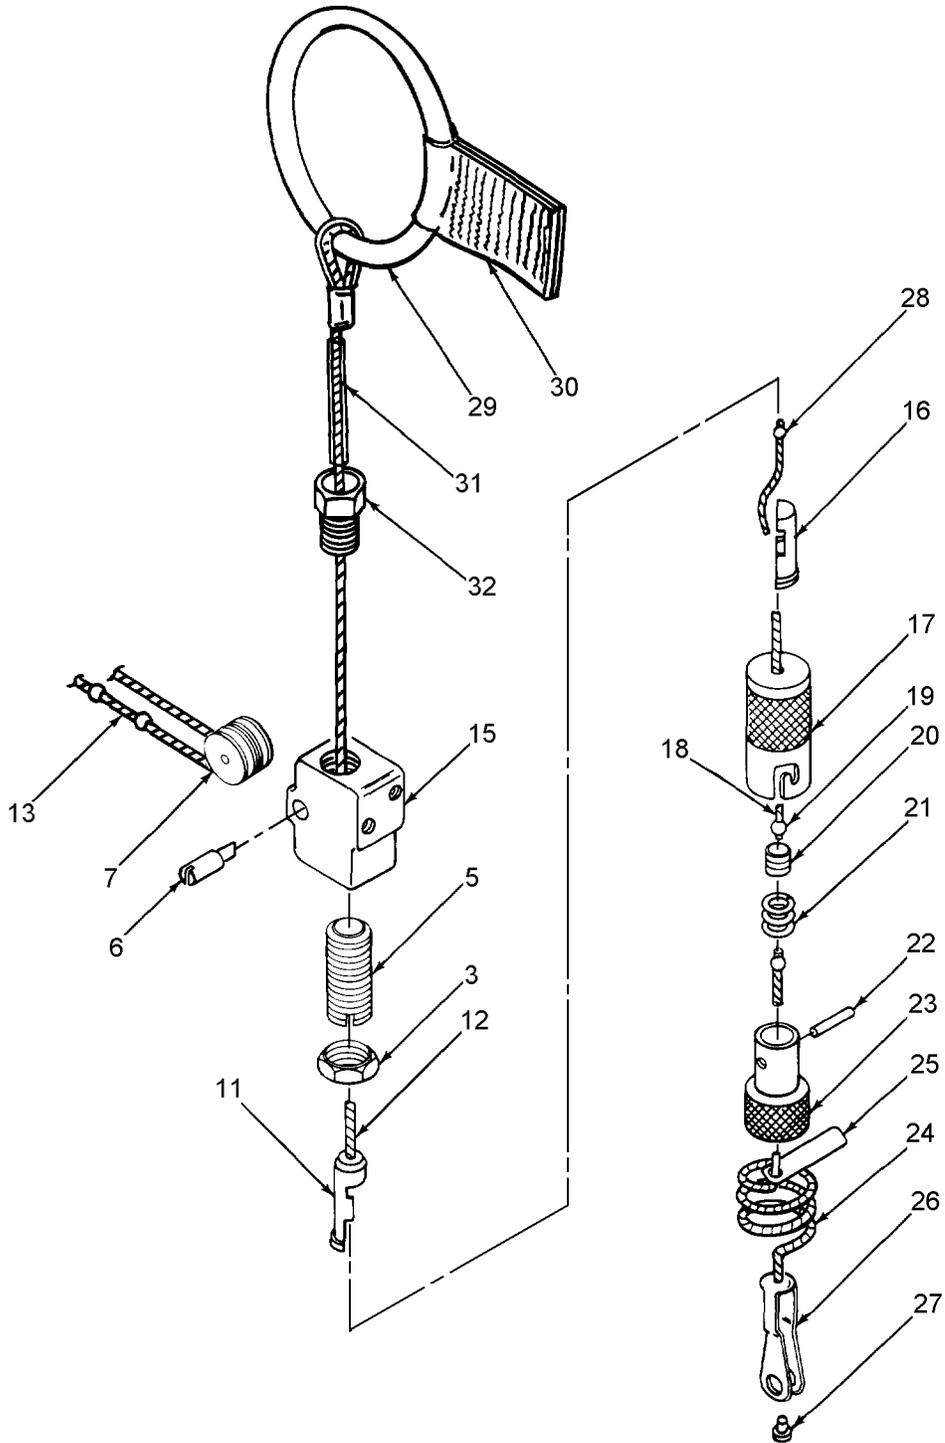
Grip and Release Assembly and Lanyard Assembly (Rocket Jet) (Sheet 1 of 2)
